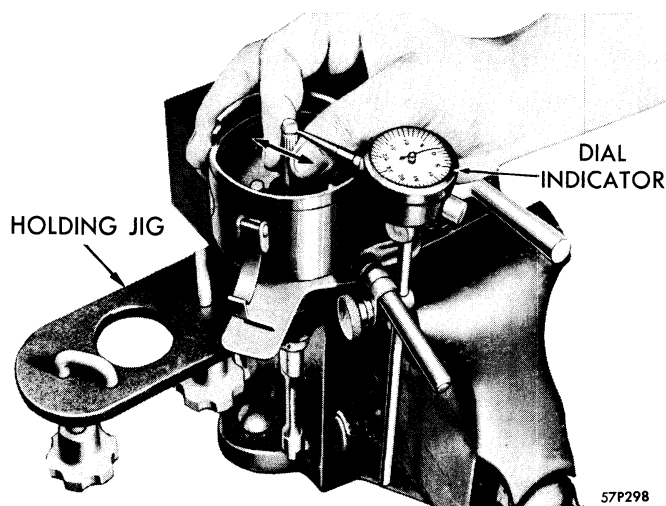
Measuring Drive Shaft Bushing Wear Using Dial Indicator
